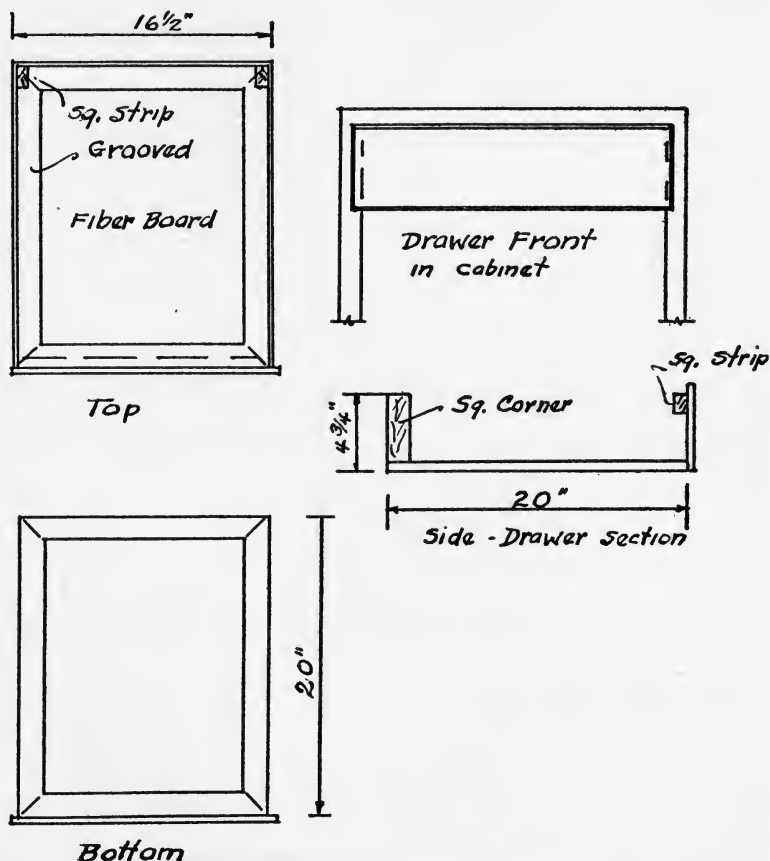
Drawer construction utilizing pine mouldings and fiber panels could be made in various sizes.
